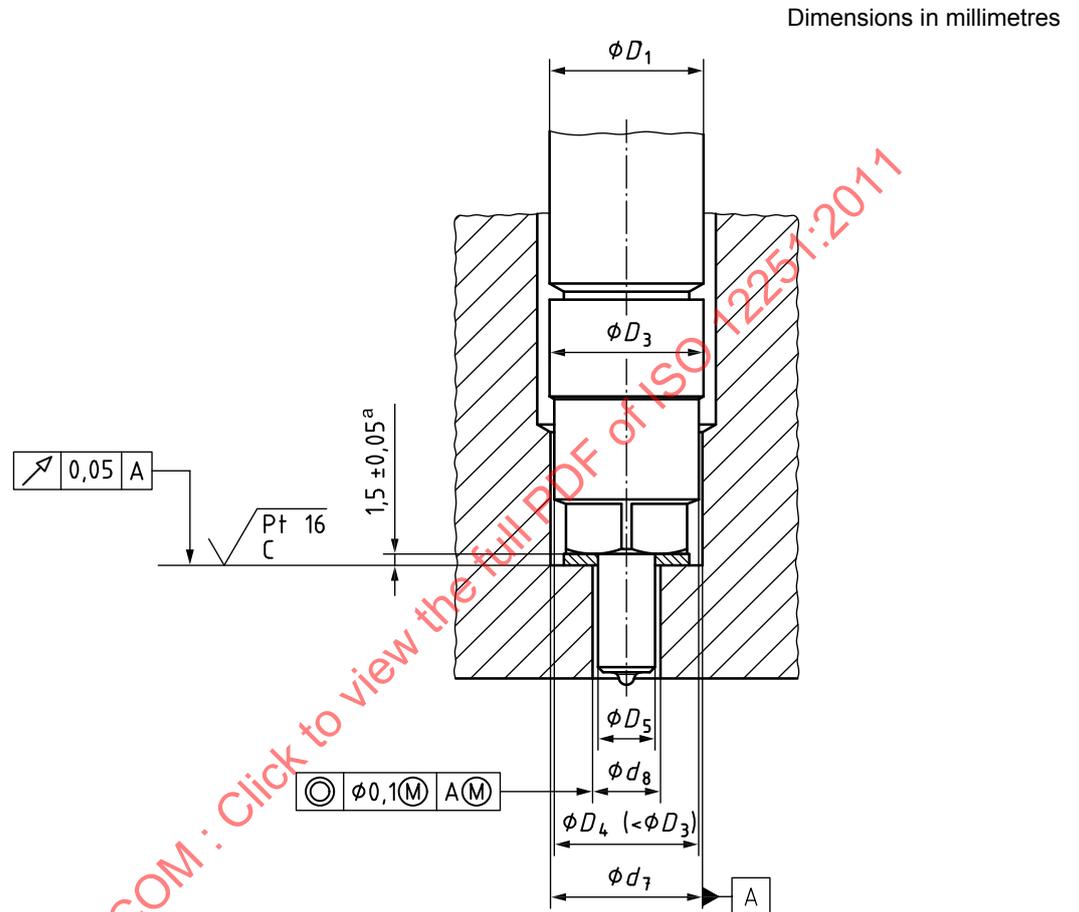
Injector and cylinder head dimensions, Type B (detail X of Figure 2)
